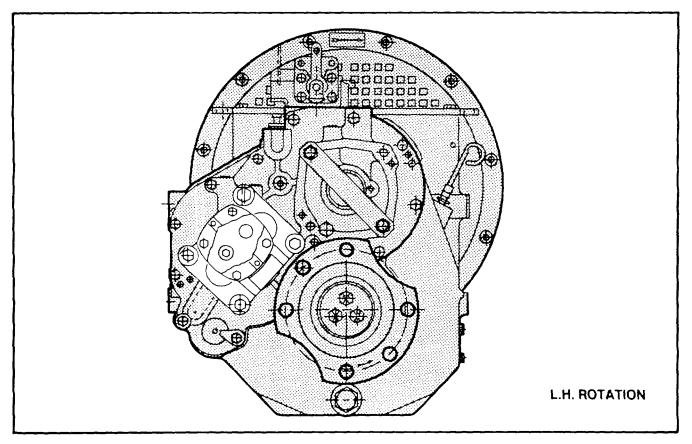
Illustrates how pump is rotated for opposite rotation.
